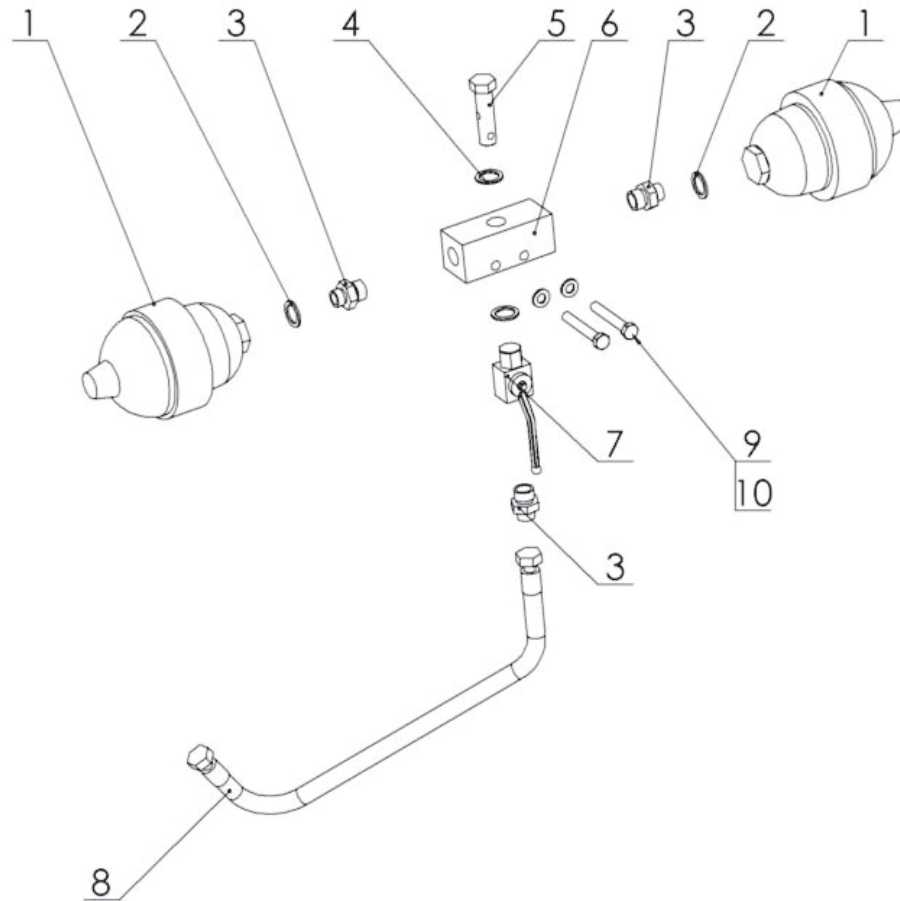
Hydraulic accumulator unit ("C" assembly)
